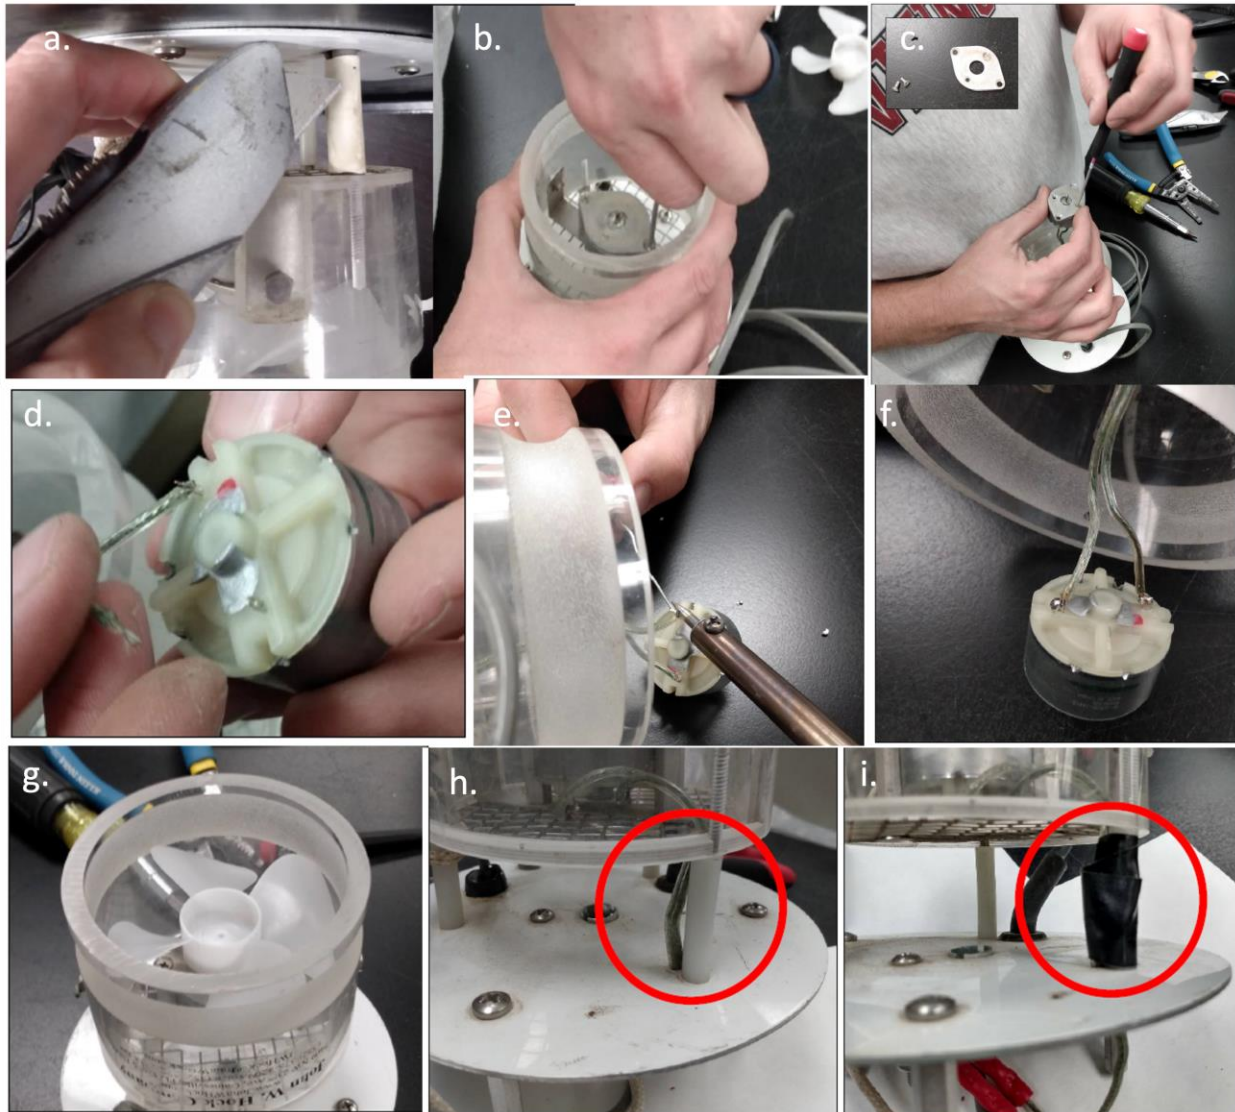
(a) Cut tape holding wire to support post; (b) remove motor from mount; (c) remove screws holding plate to the motor; (d) thread wire through hole in new motor terminal; (e) solder the motor terminals – positive copper wire gets soldered to the terminal with the red dot; (f) completed soldering work; (g) proper orientation of fan in the motor; (h) wire and support mount with tape removed; (i) and with electrical tape added.
